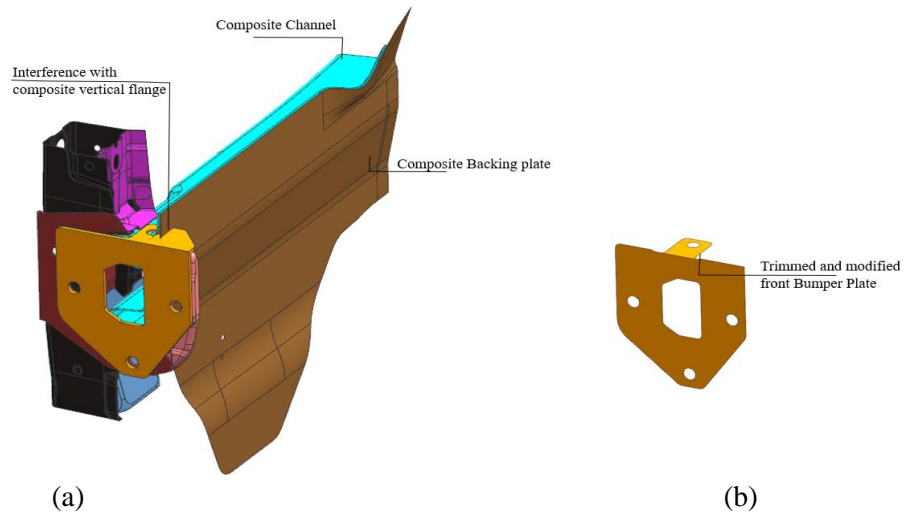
Composite backing plate: (a) interference with production front bumper bracket, (b) gap between the bracket and backing plate.
